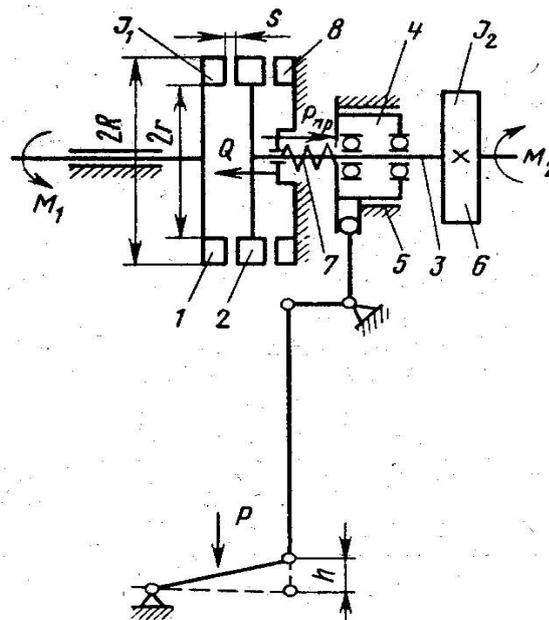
Kinematic diagram of the friction clutch of the sewing machine drive
